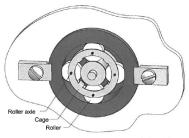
John Harrison's caged roller bearing. (Adapted from Andrewes [35].)
